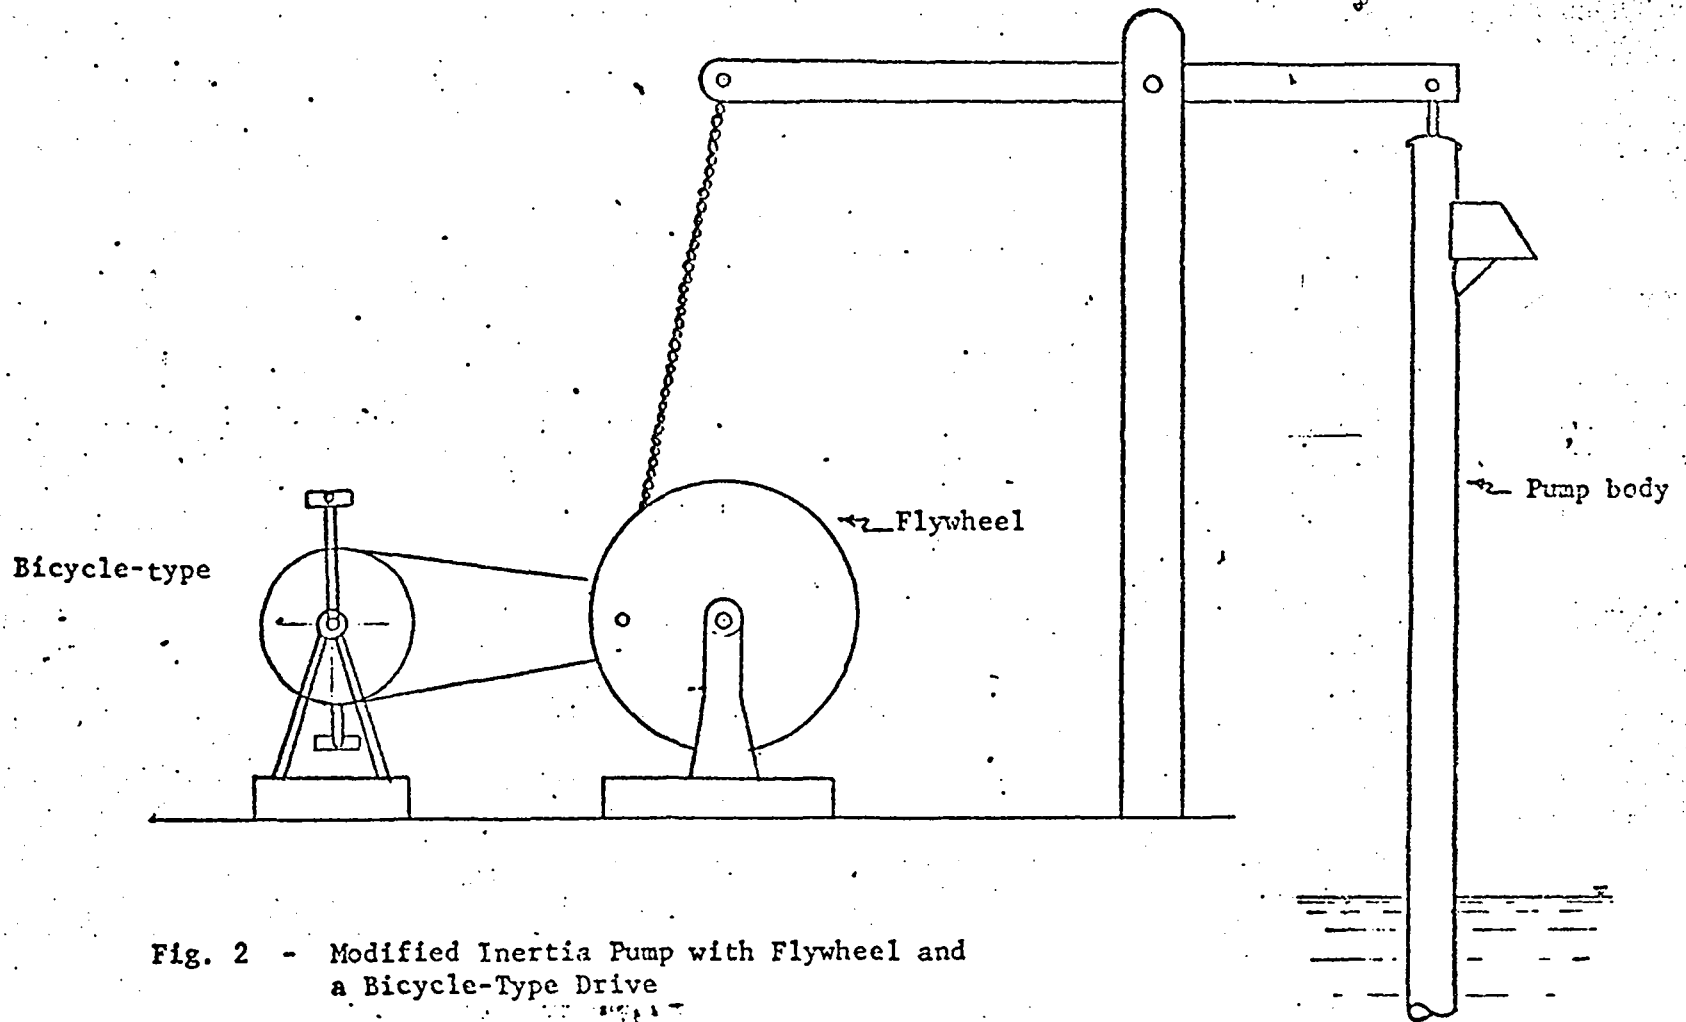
Modified Inertia Pump with Flywheel and a Bicycle-Type Drive
